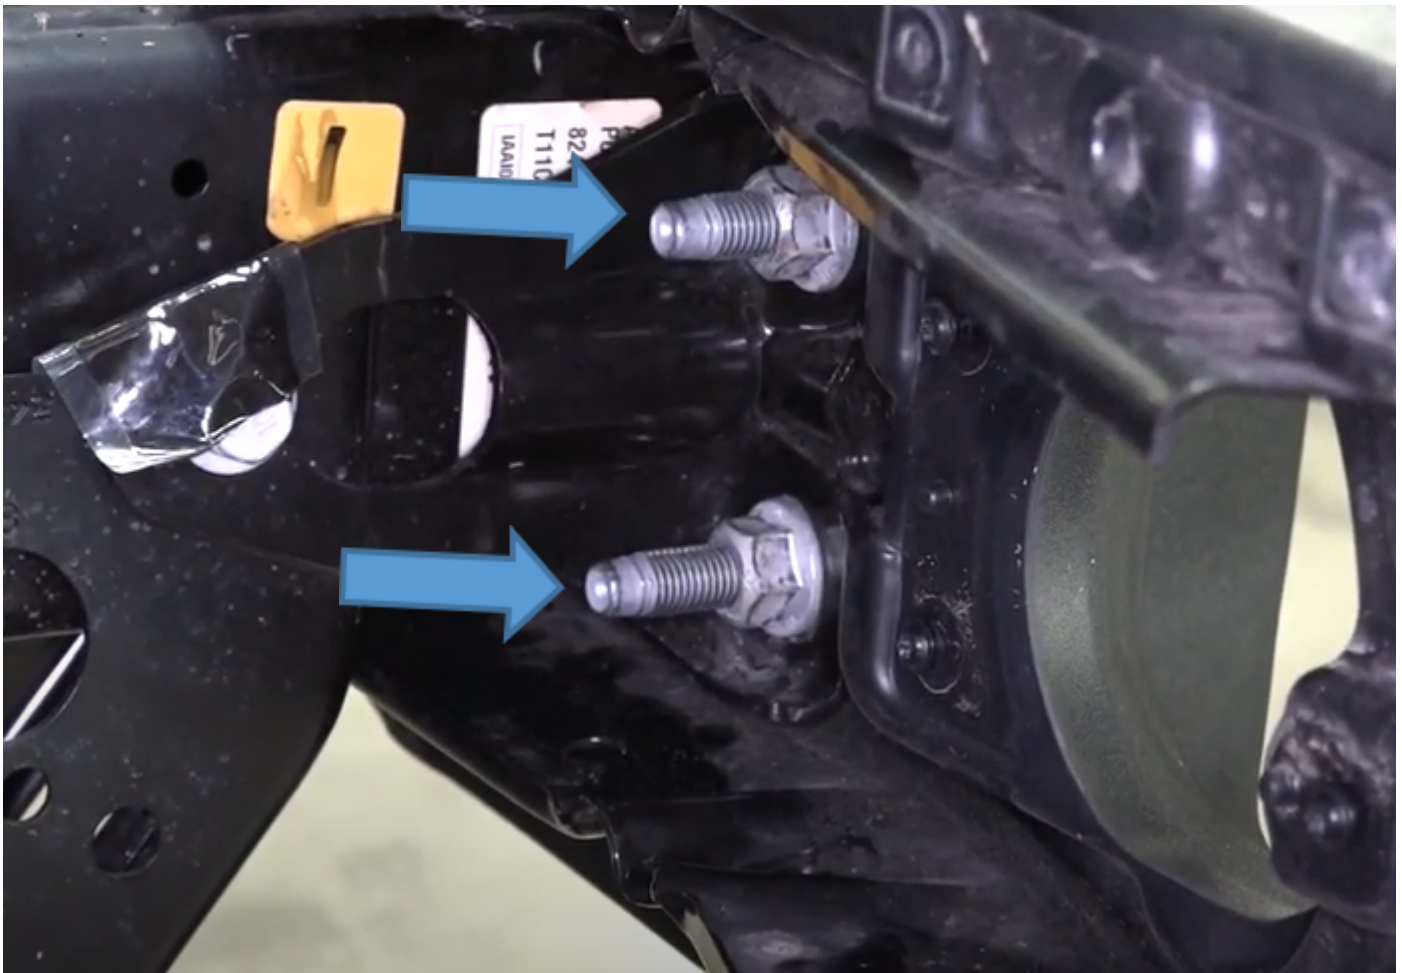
Passenger Side Frame Rail Showing 2 of 8 Bumper Mounting Bolts
